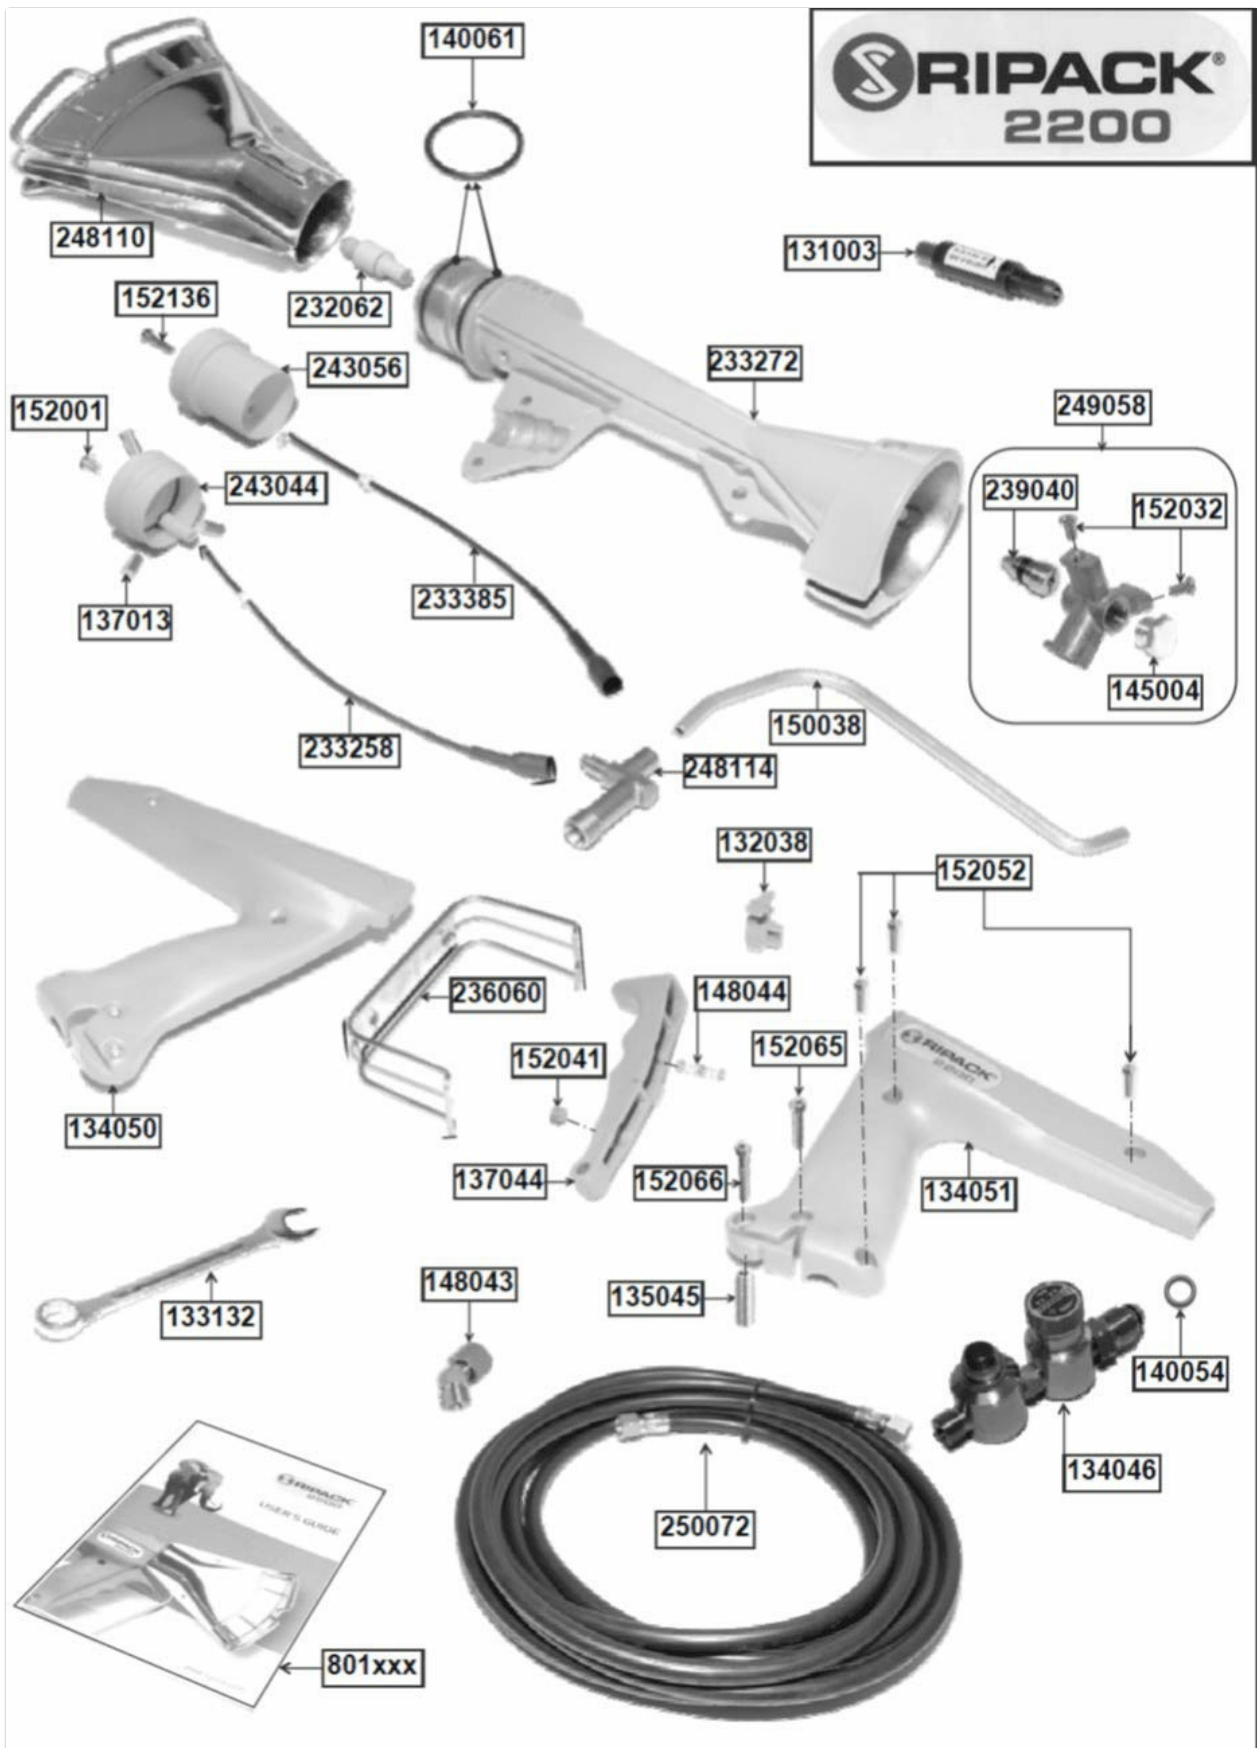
Ripack 2000 Heat Gun Exploded Diagram. Part #148043, the swivel connector, is located near the base of the handle, connecting to the gas hose.
